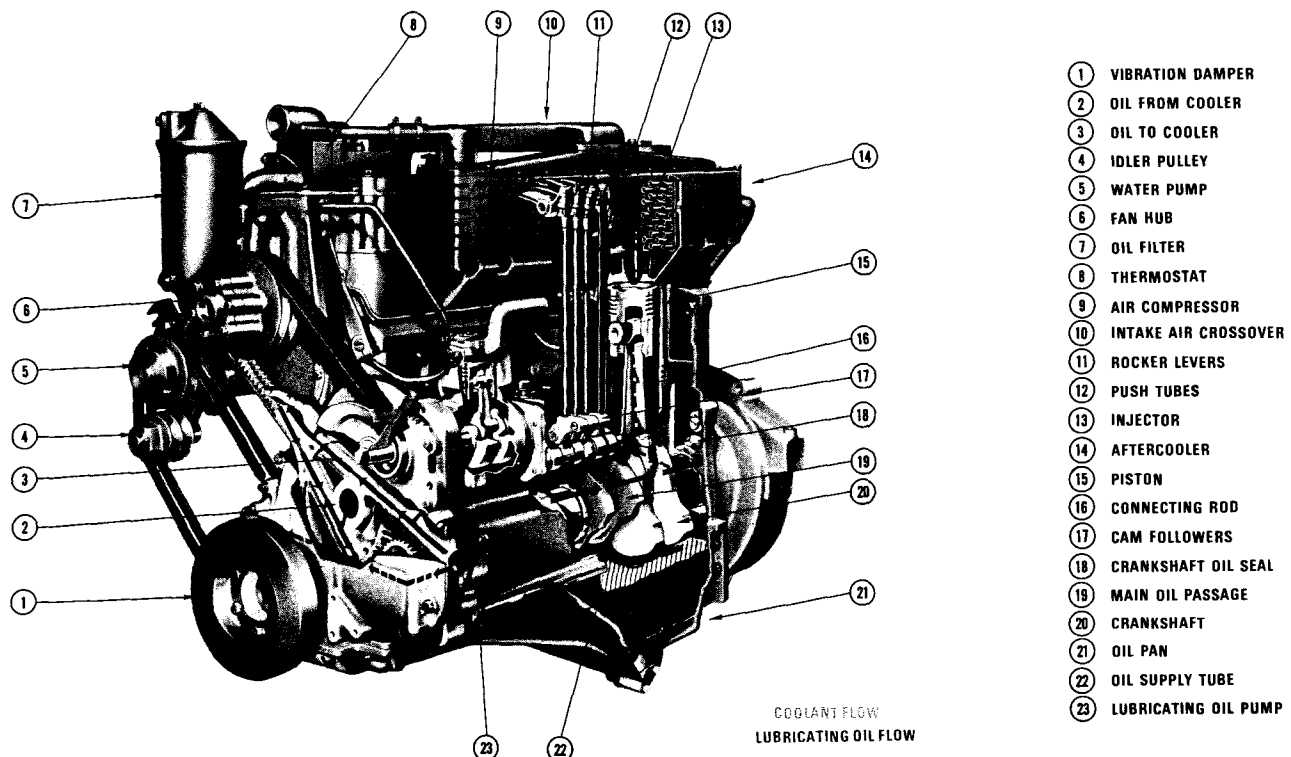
, (LWC-22). Coolant and lubricating oil flow — NTA Engine
